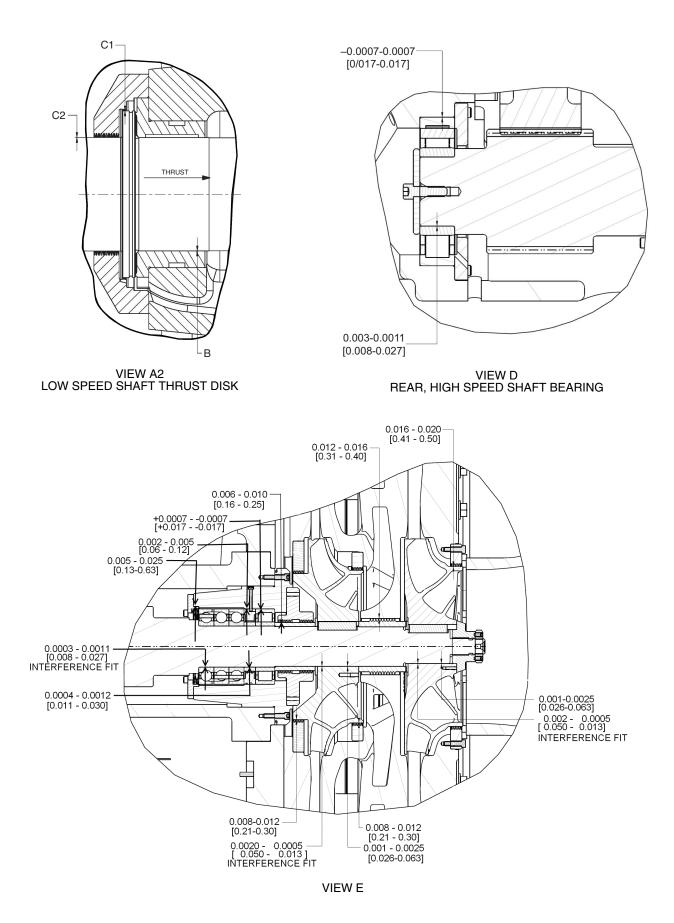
Compressor Fits and Clearances — Two-Stage Compressors (cont)
